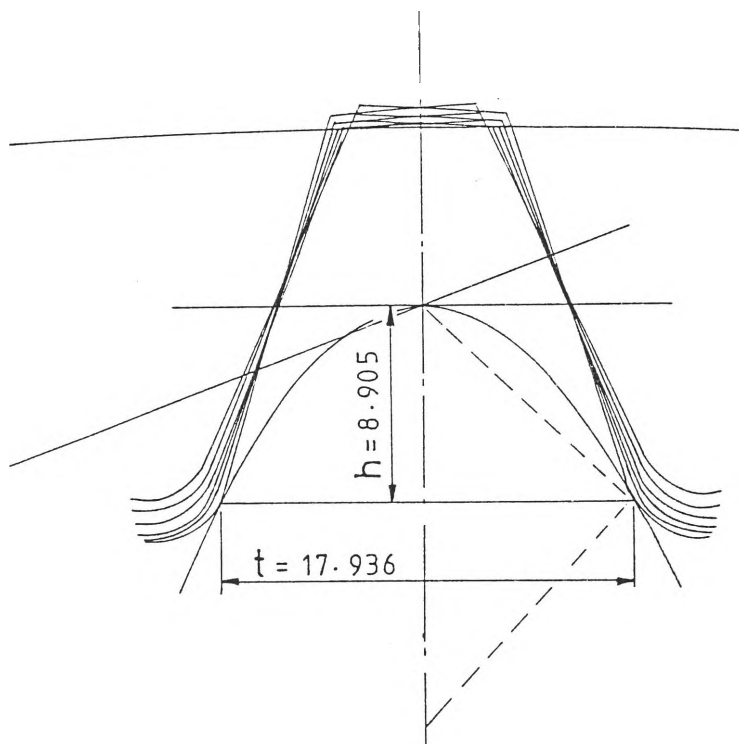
LCR HELICAL WHEEL PARABOLA
